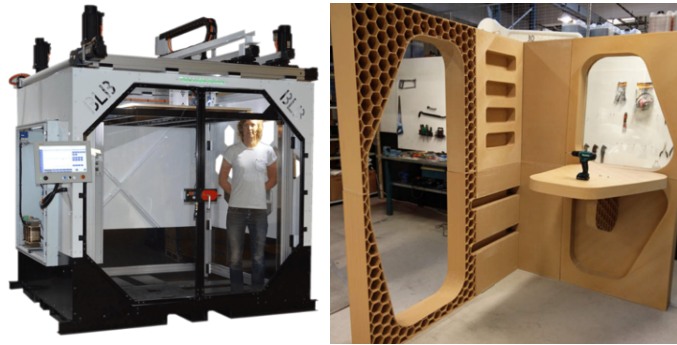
THE BOX printer and a printed corner of a house module (BLB\_Industries 2018)
